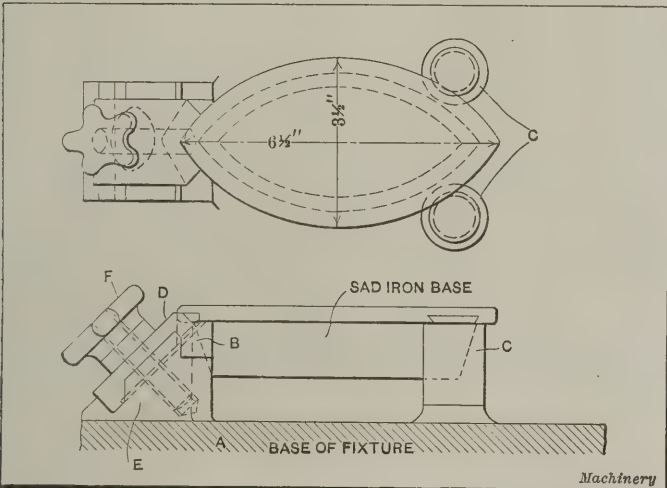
Method of Clamping the Sad Iron Bases on the Continuous Rotary Milling Fixture
